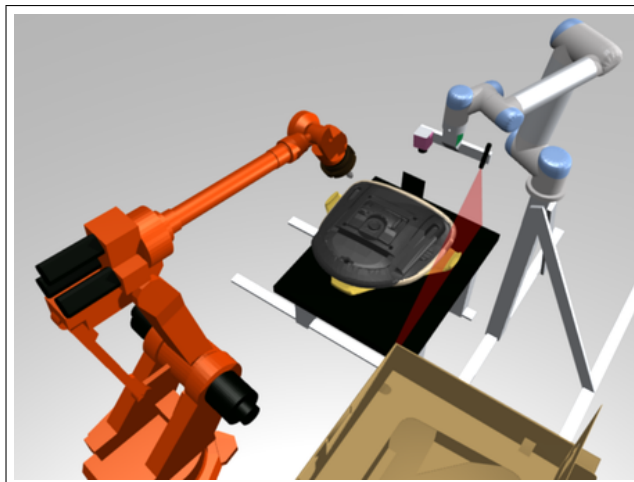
The setup of robots, laser, smart camera, chair seat, and cardboard box in the transfer cell prototype. Illustration from emulation setup.
